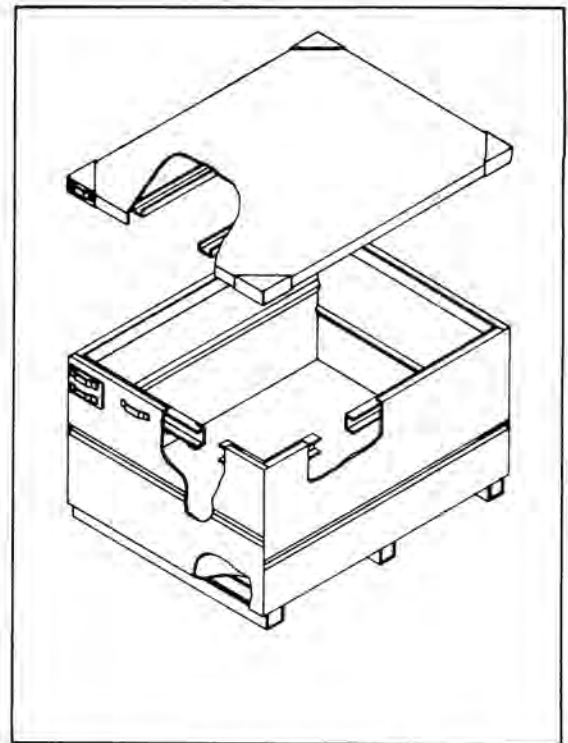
Sketch of a Type A steel rectangular container built for use at West Valley.
